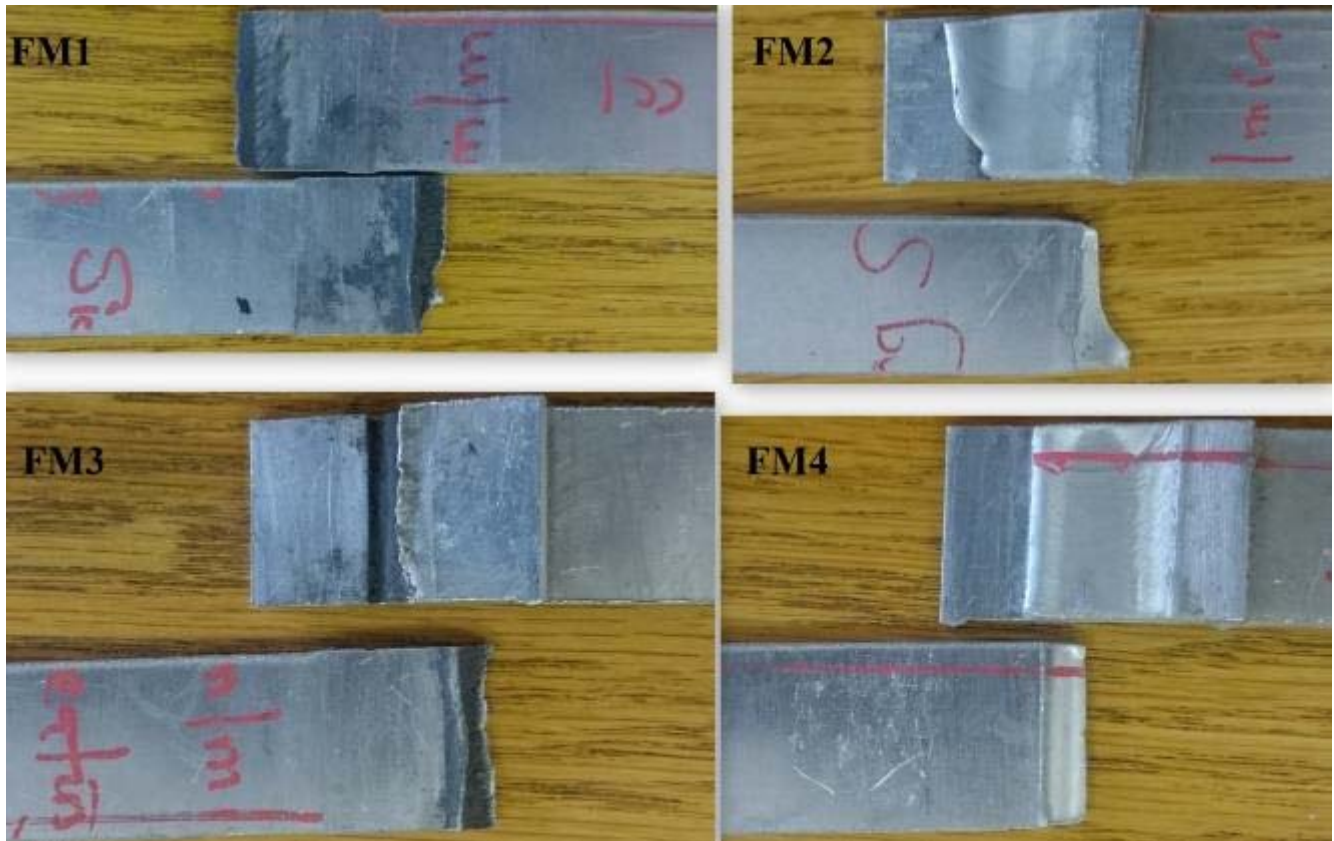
Fracture mode of the welded samples at different process parameters
